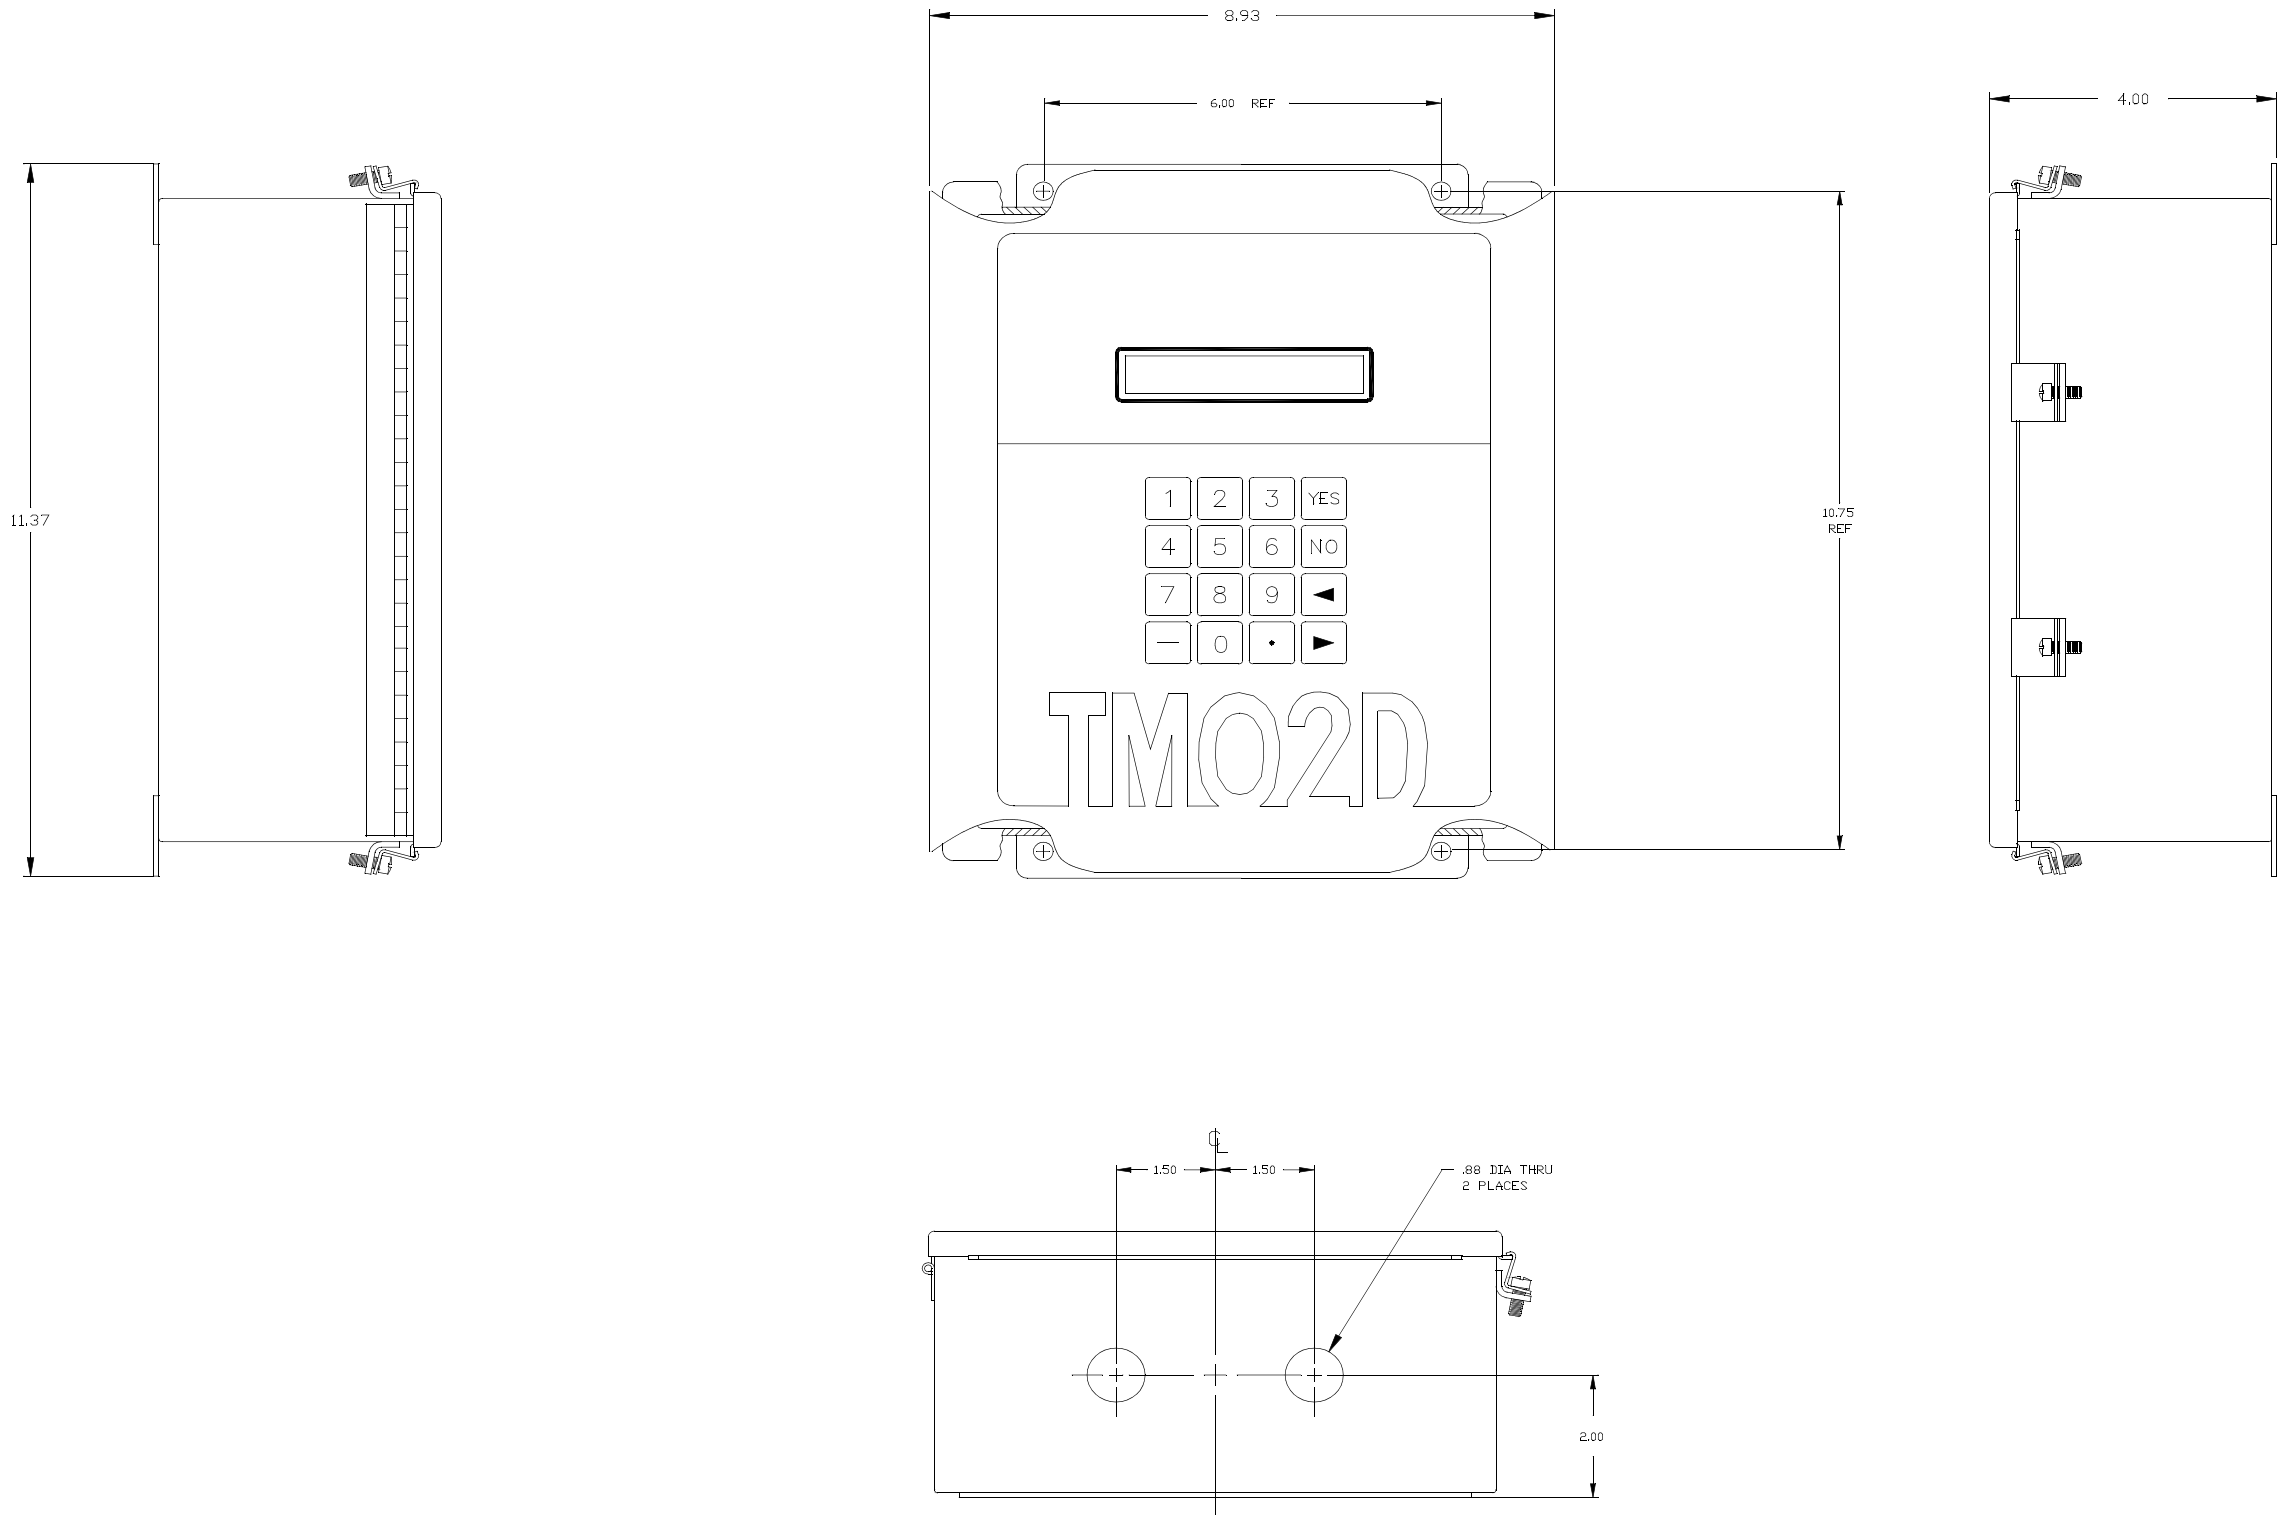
Stainless Steel Weatherproof Outline and Dimensions (Dwg. #712-1123)
